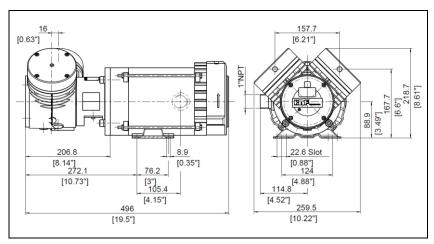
Mounting dimensions UN035._S_I EX including .9 versions. See head connection diagram. (All dimensional tolerances conform to DIN ISO 2768-1, Tolerance Class V)
